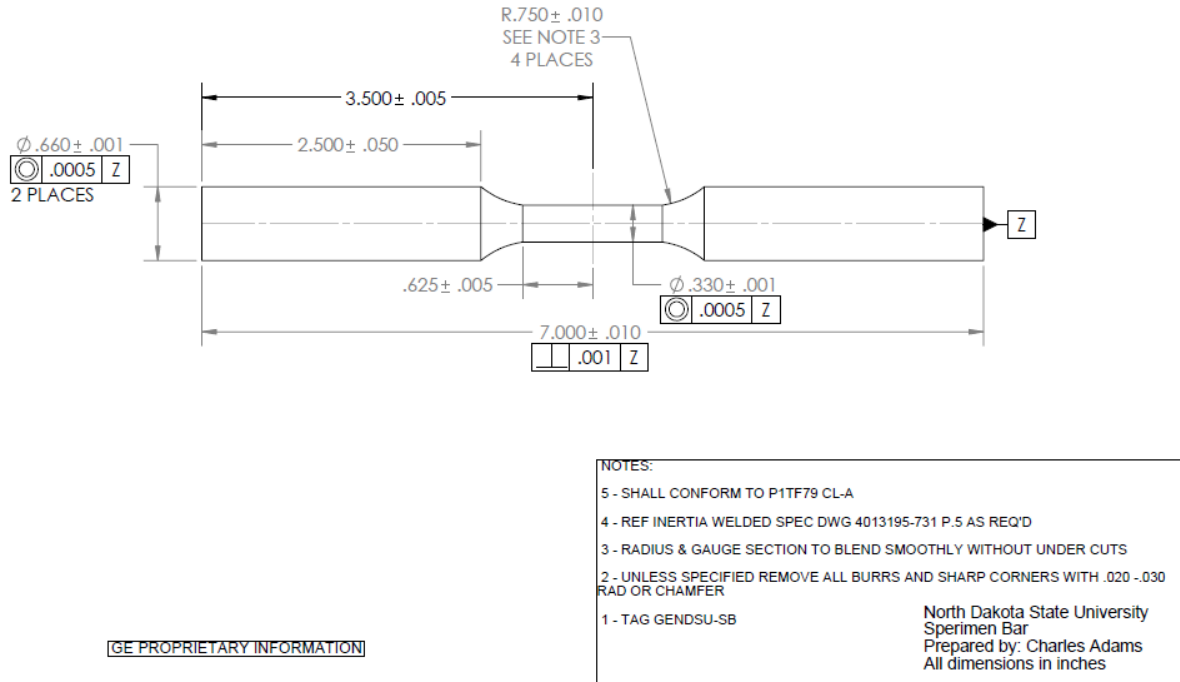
Dimensions of the GENDSU-SB LCF specimen.
